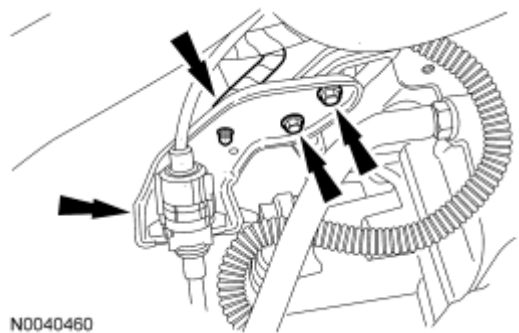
Locating Selector Lever Cable, Bracket And Bolts
